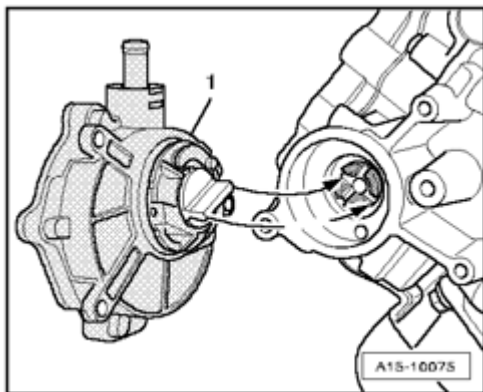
Positioning Vacuum Pump Coupling So That It Engages Symmetrical Groove Of Camshaft When Installing Vacuum Pump
